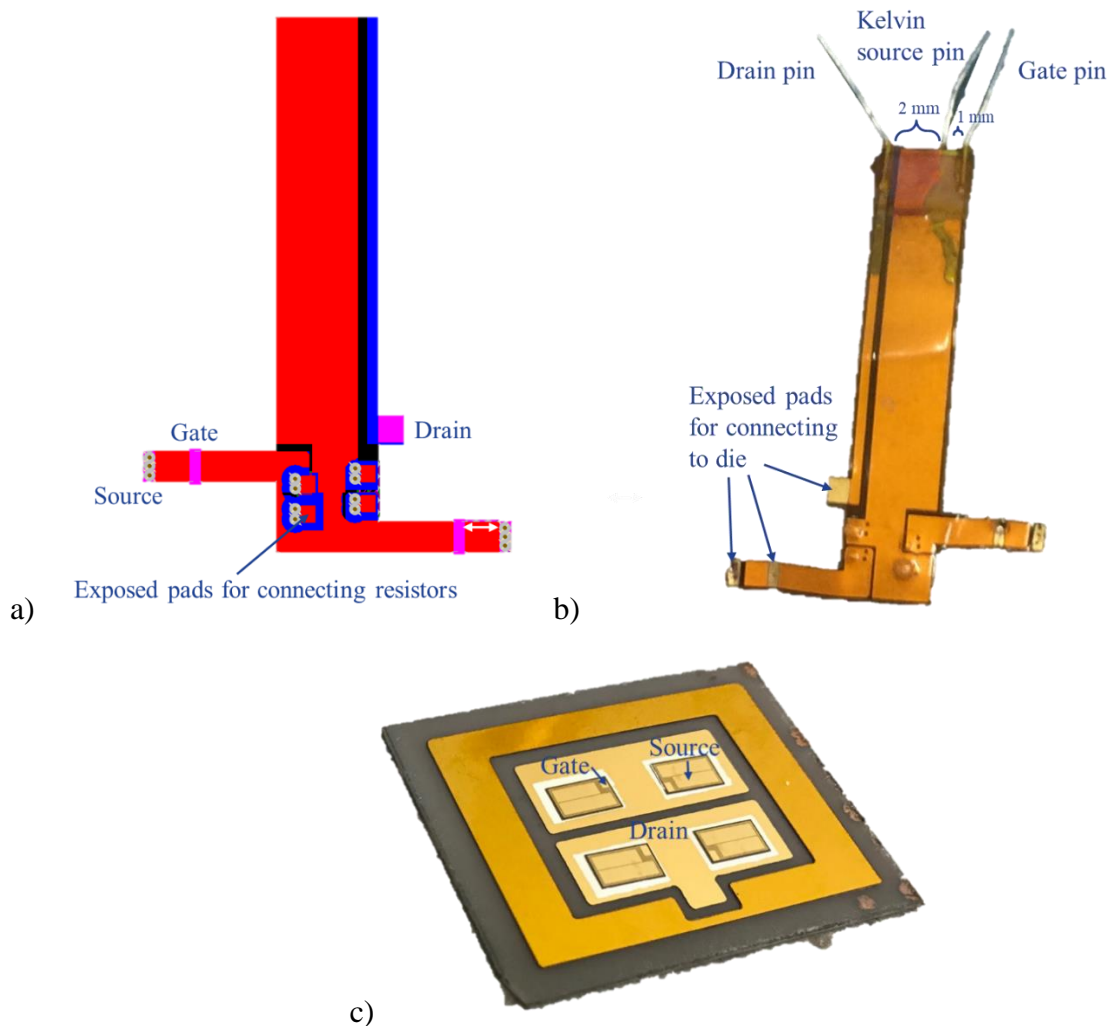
a) Top view of the flexible PCB from Altium designer, b) bottom view of the fabricated flexible PCB, and c) substrate with dies displaying connection points for flexible PCB
